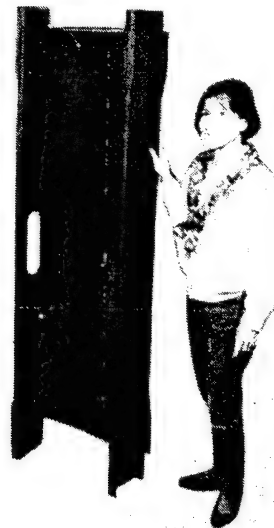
WING BOX PART BEFORE FINAL ASSEMBLY
